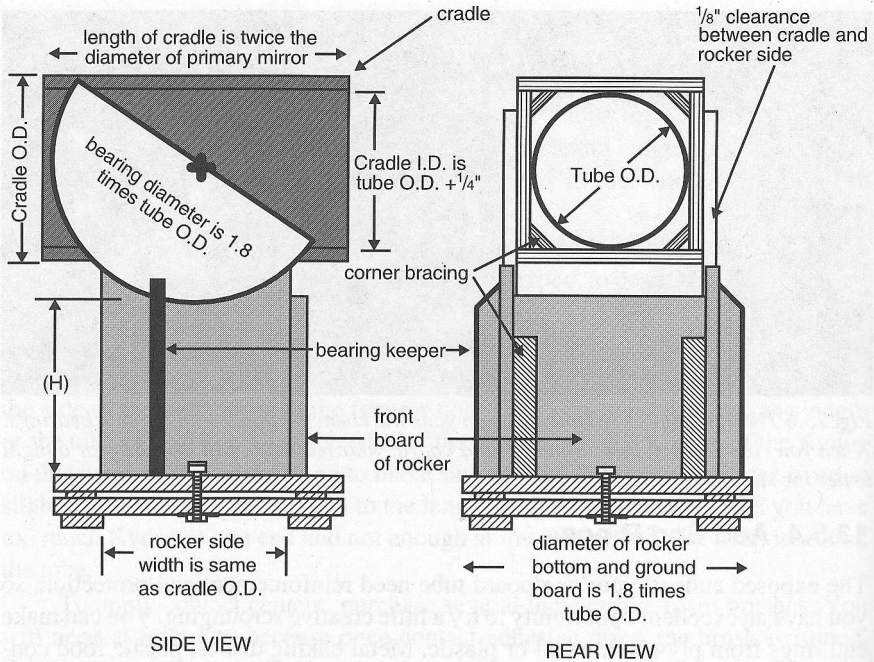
The mounting is constructed from 1/2-inch hardwood plywood. The tube cradle is sized to fit the optical tube assembly; the large side bearings are attached directly to it. This mounting is quite compact: the rocker stands only about a foot high.
